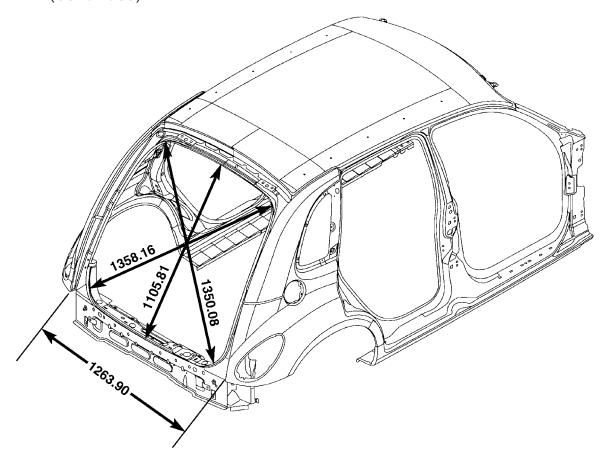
REAR LIFTGATE OPENING DIMENSIONS
